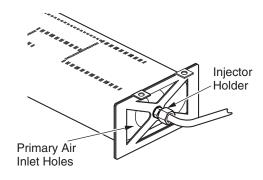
Injector Holder On Outlet Burner Tube - Front Burner
